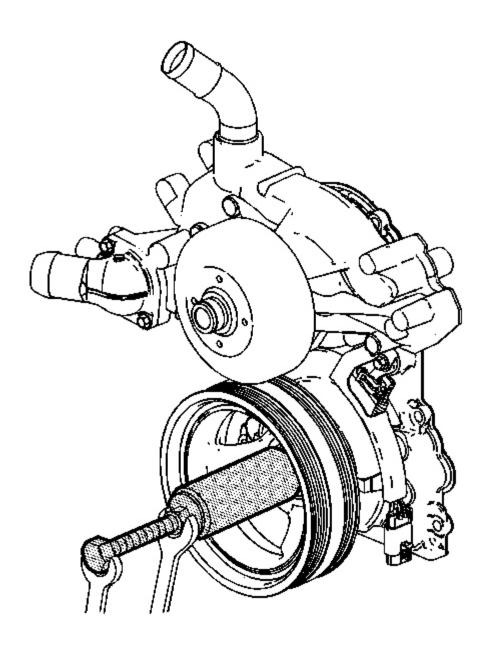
Installing Balancer Courtesy of GENERAL MOTORS CORP.
